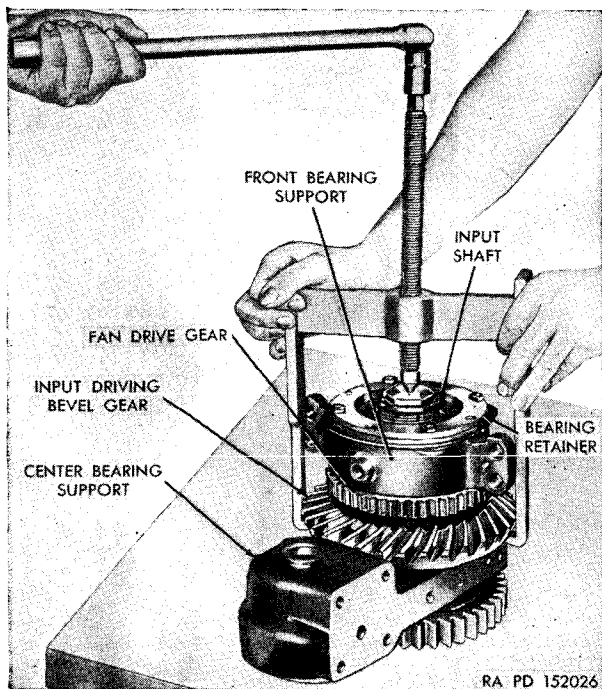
Removing input-driving bevel gear, fan-drive gear and front bearing assembly.
